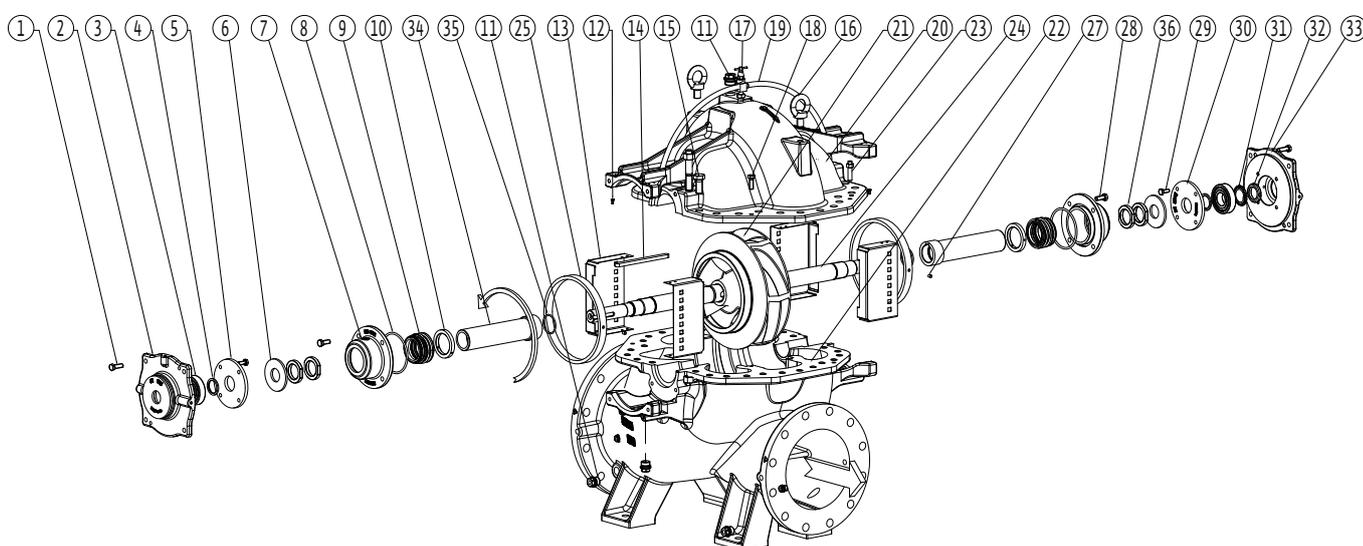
Exploded view of Atmos TERA-SCH hydraulic (mechanical seal version with sleeves)
